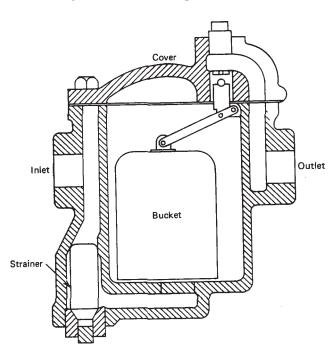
Inverted bucket steam trap. (Courtesy of Armstrong Machine Works)
